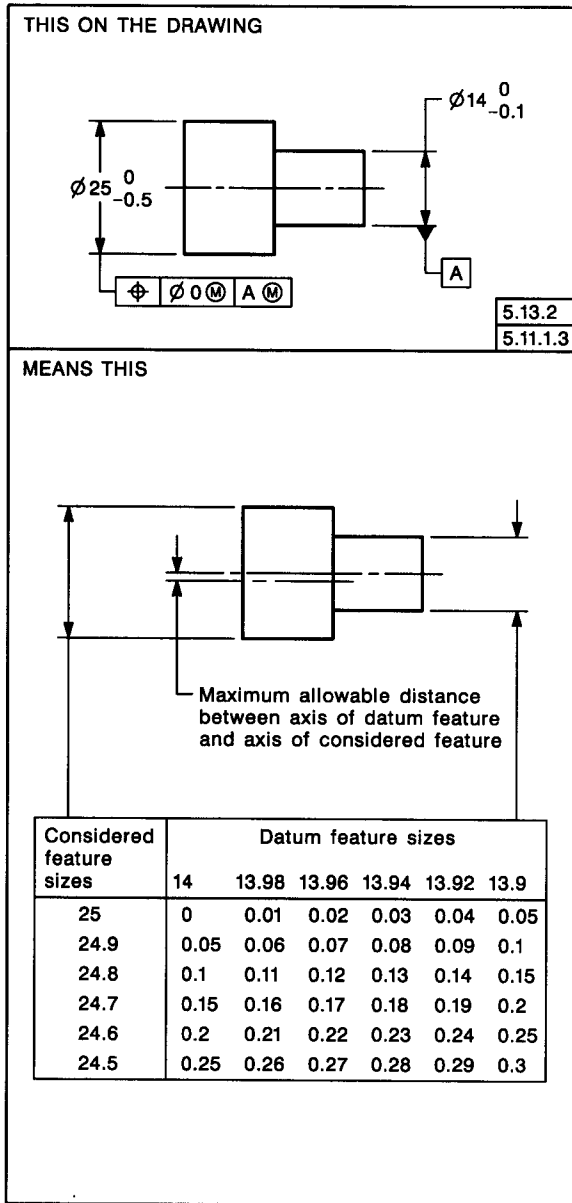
ZERO POSITIONAL TOLERANCING AT MMC FOR COAXIALITY
